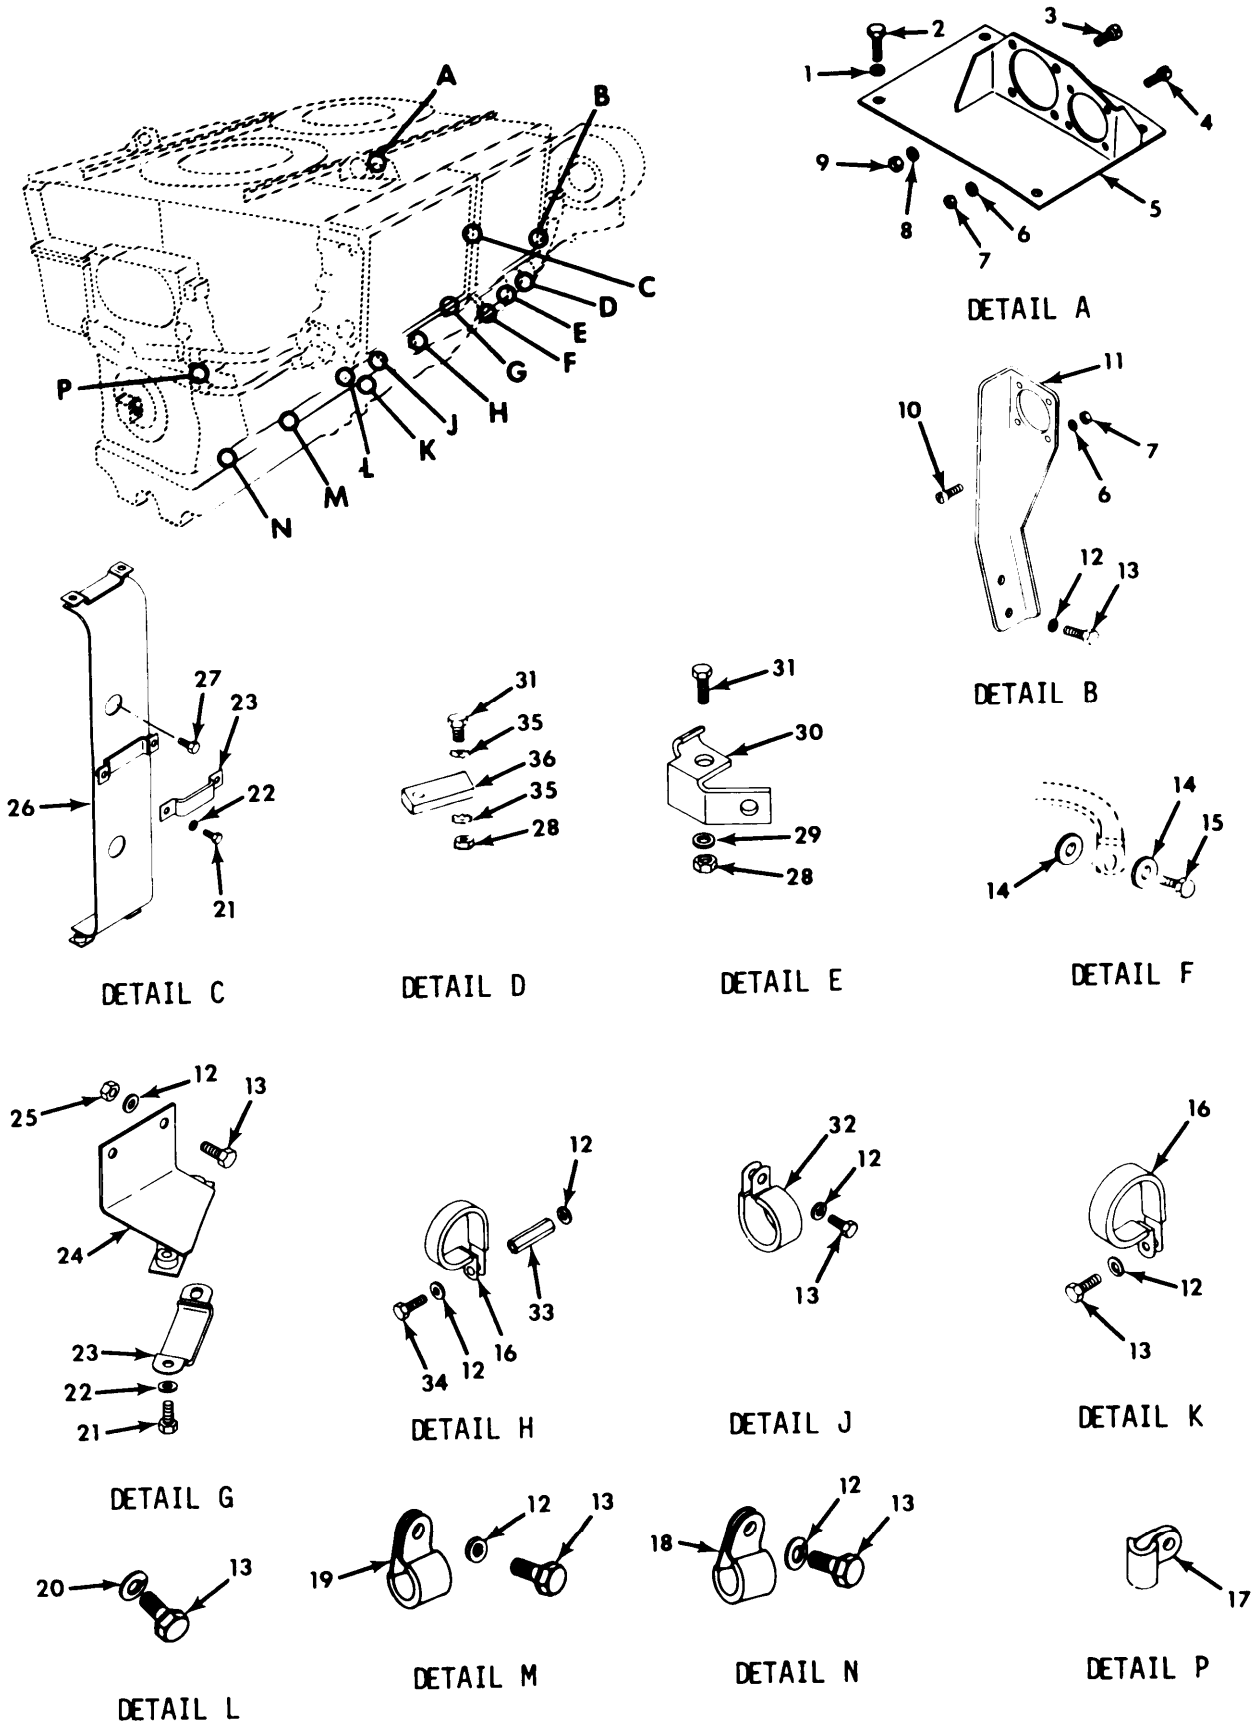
ENGINE WIRING HARNESS BRACKETS AND CLAMPS (FIGURE 1 OF 3).
